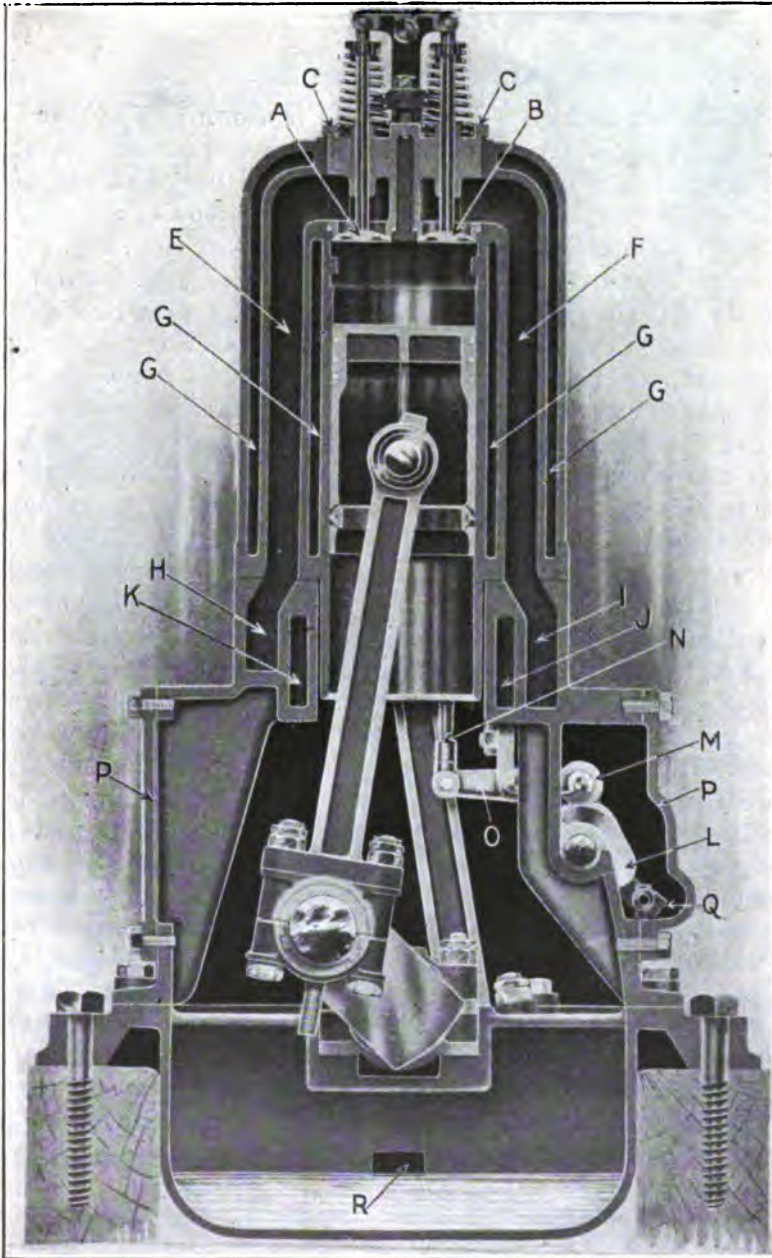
Sectional view through cylinder of Ralaco four-cycle marine motor having completely water-jacketed inlet and exhaust gas passages integral with the cylinder casting.
